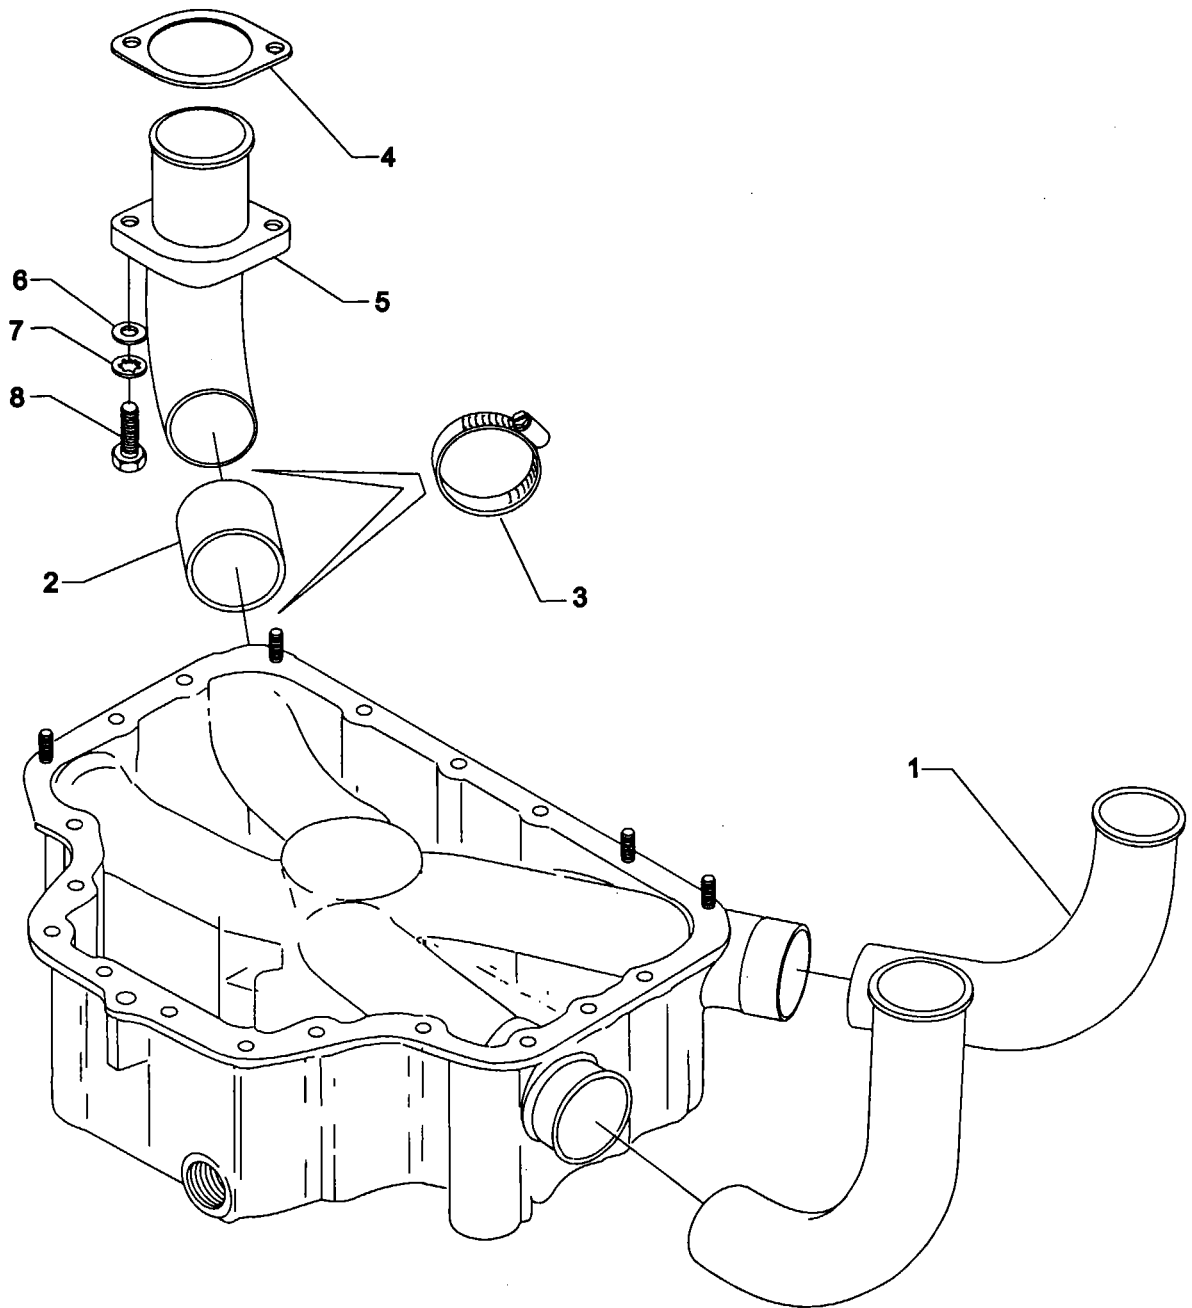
INTAKE PIPES AND ATTACHING PARTS
